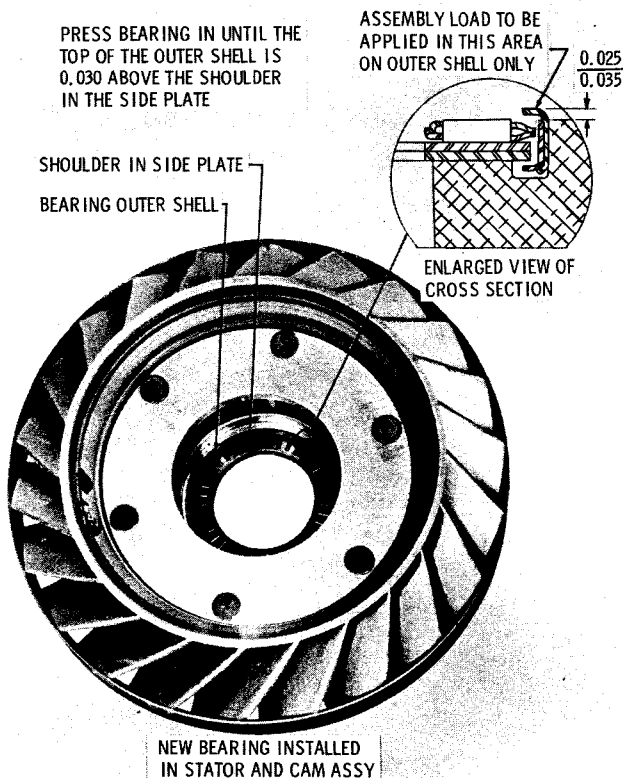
Installation of thrust bearing assembly in stator (TC 300)
